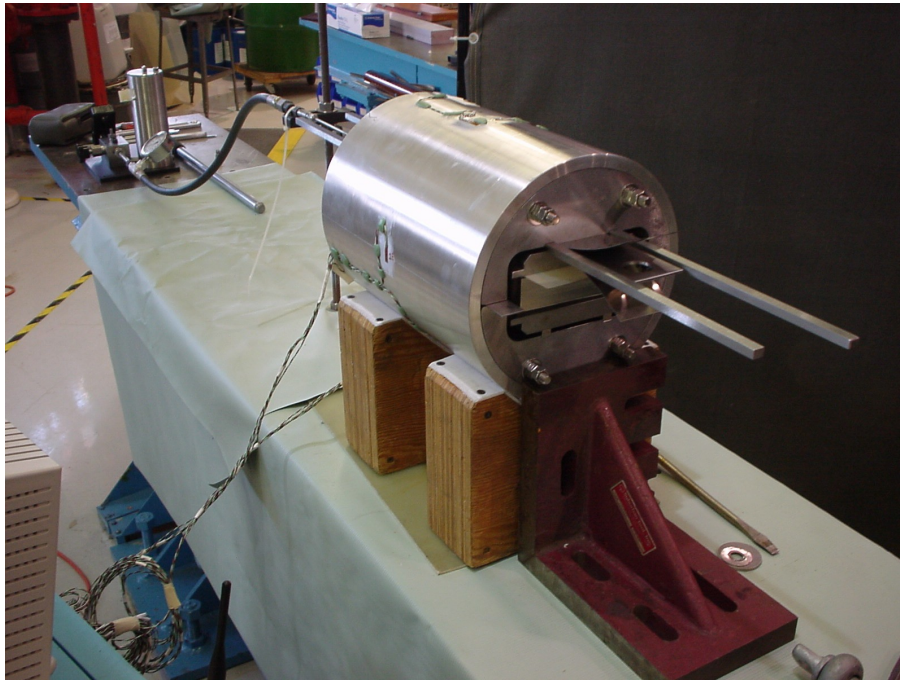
A mechanical model used for cylinder yoke pre-assembly.
